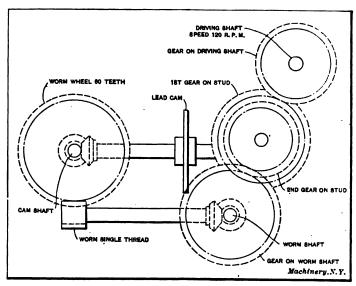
Diagram of Gearing on the No. 2 Brown & Sharpe Automatic Screw Machine
